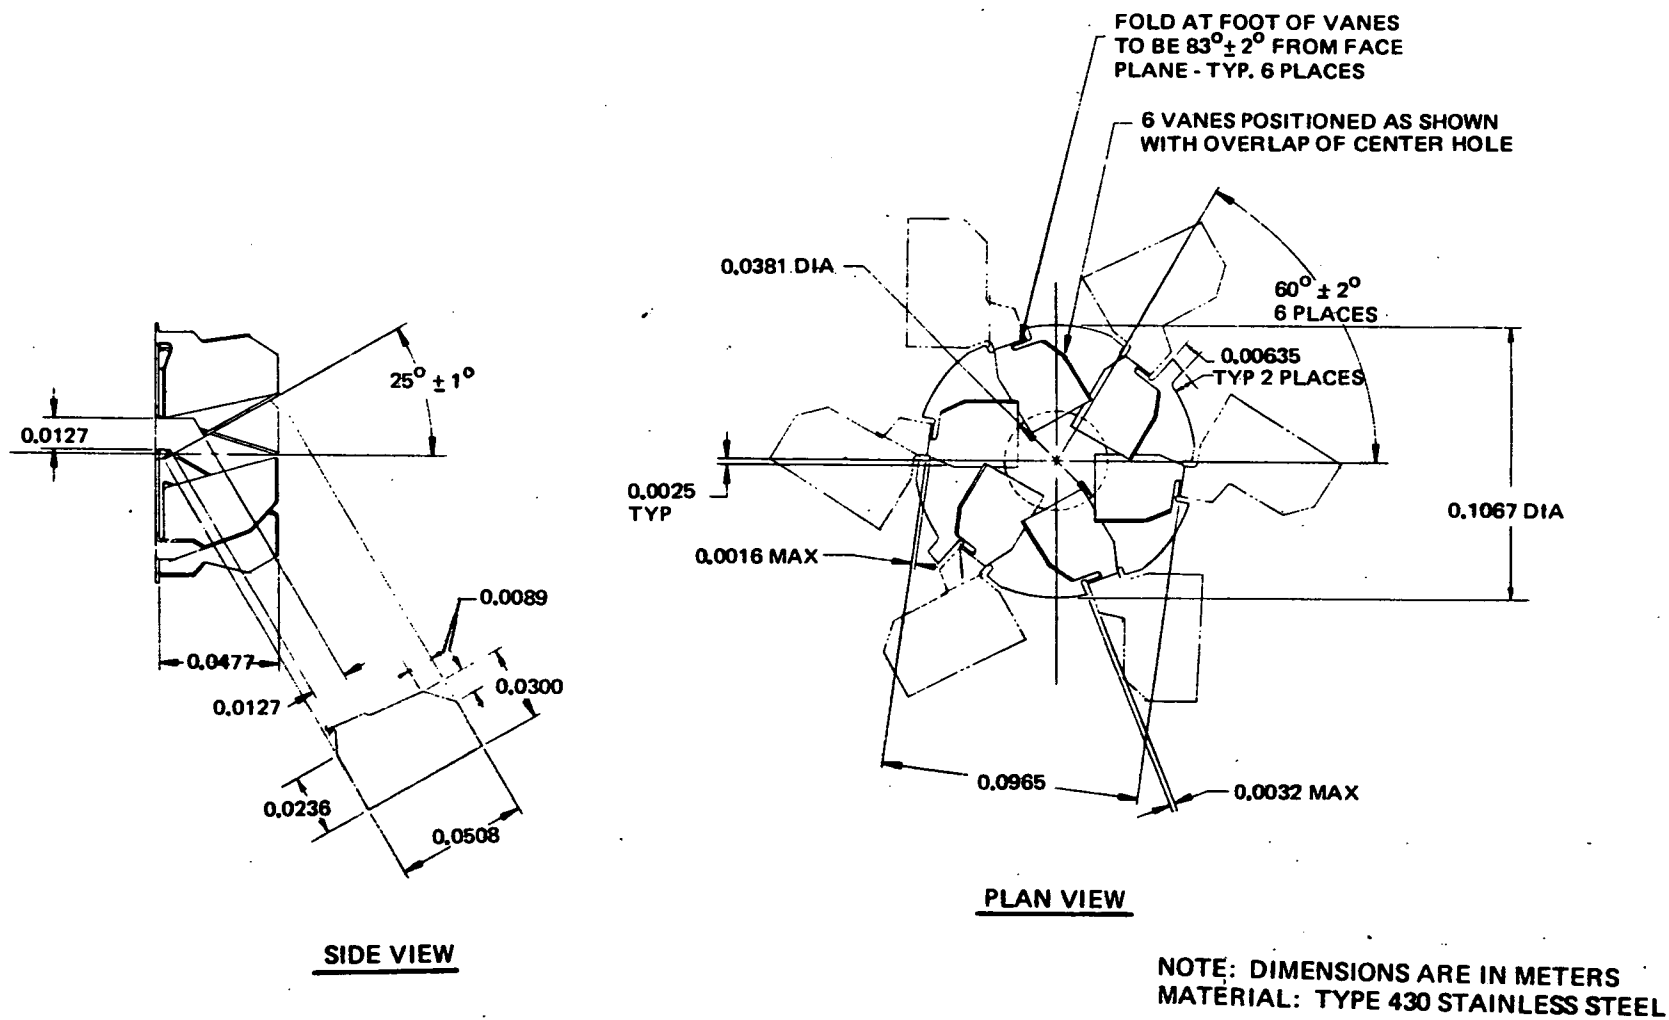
Layout drawing of the stamped-formed, sheet metal prototype optimum burner head
